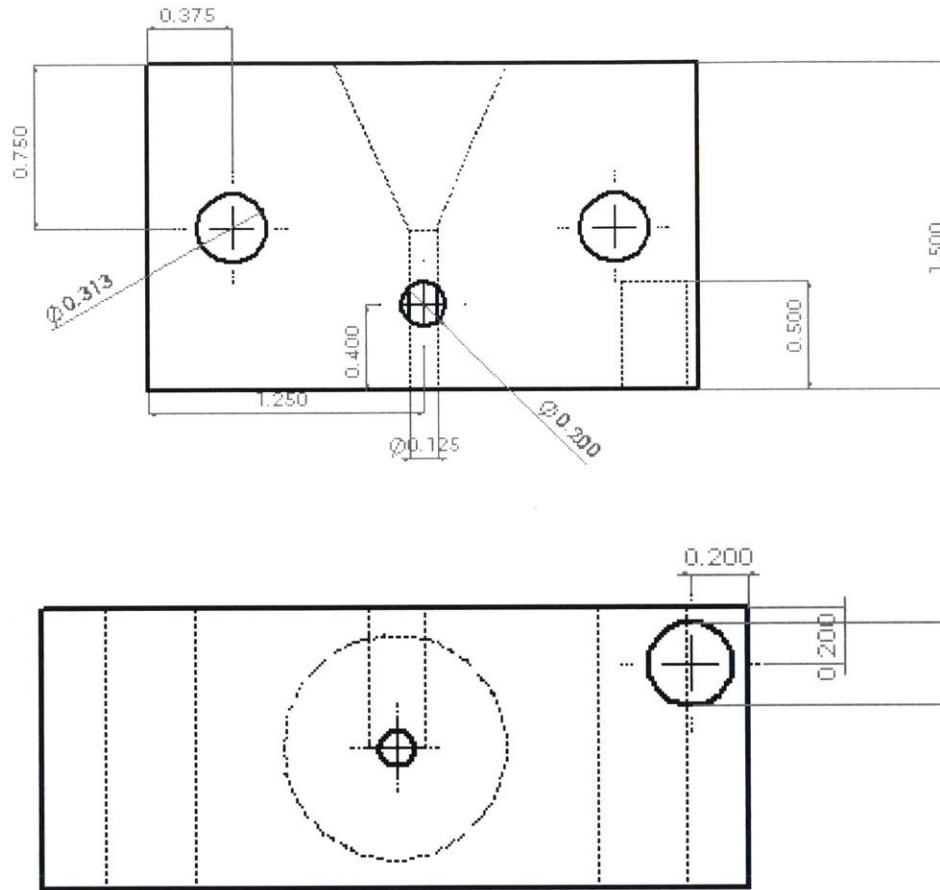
engineering drawing views of the modified conical shaped support (dimensions are in inches)
